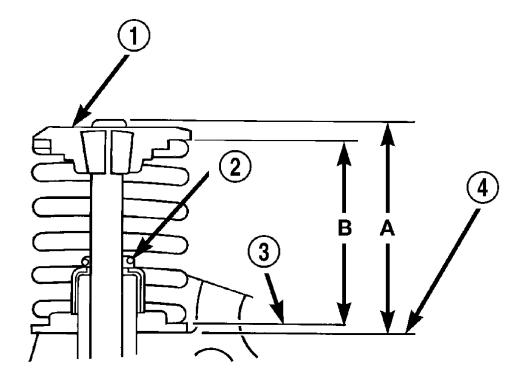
Identifying Valve Seal & Spring Seat Assembly Courtesy of CHRYSLER LLC
